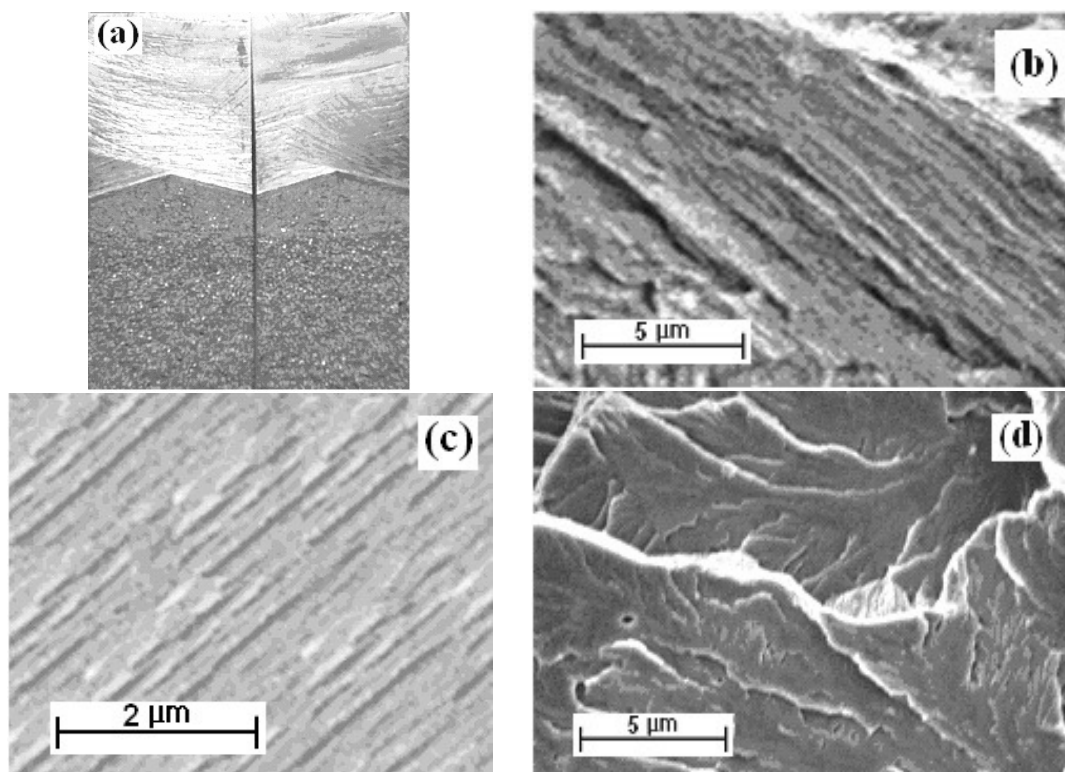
(a) Optical micrograph of fracture surface of a specimen. (b), (c) and (d) SEM Fracture surface morphologies: (b) and (c) fatigue fracture surface showing the presence of striations; (d) final forced sheared fracture surface due to plane strain conditions.
